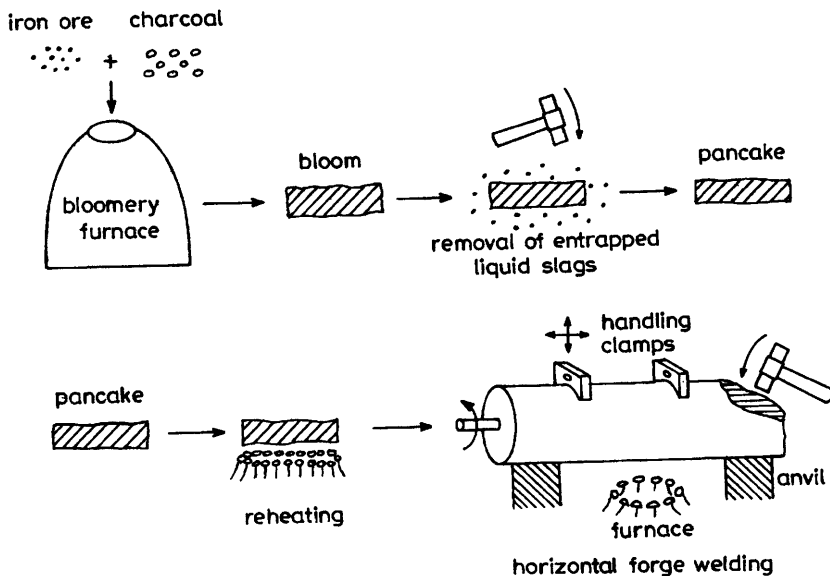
Schematic of the manufacturing methodology of the Delhi iron pillar (from iron making to horizontal forge welding).
